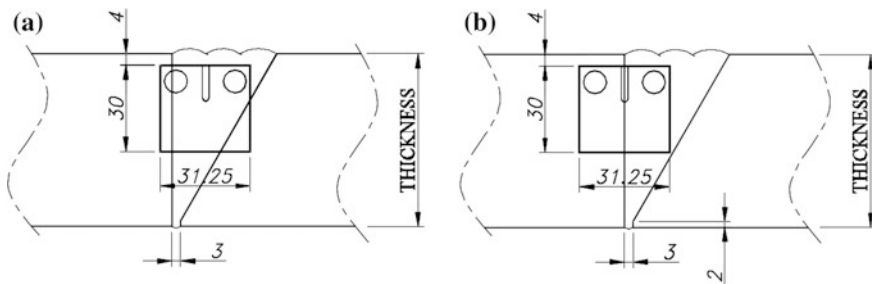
Schematic drawings of CT specimens machined from the welded plates made of P22 and P91 with a notch in the WM and b notch in HAZ
